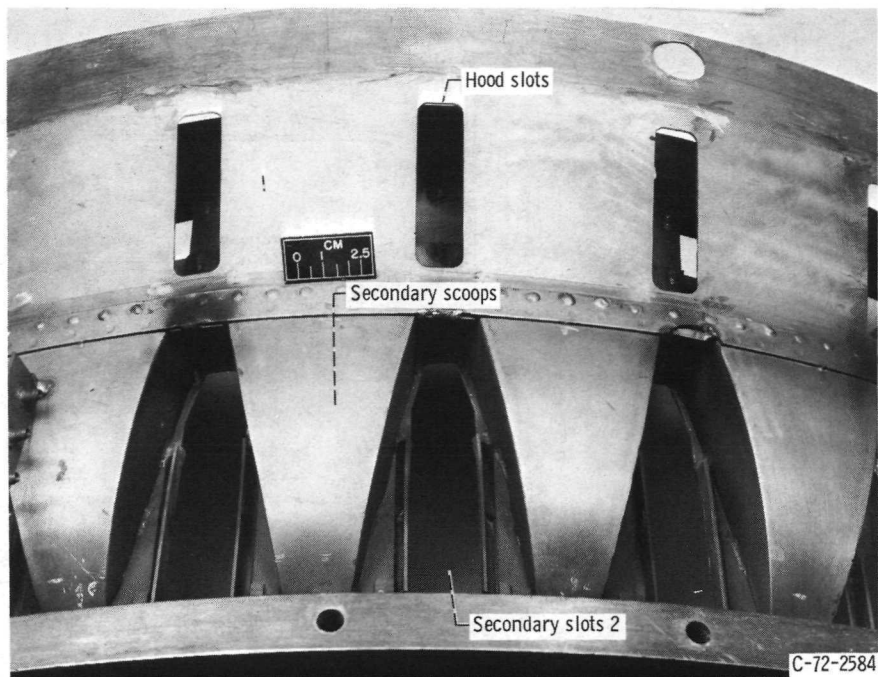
Top view of liner 3, showing hood slot arrangement.
